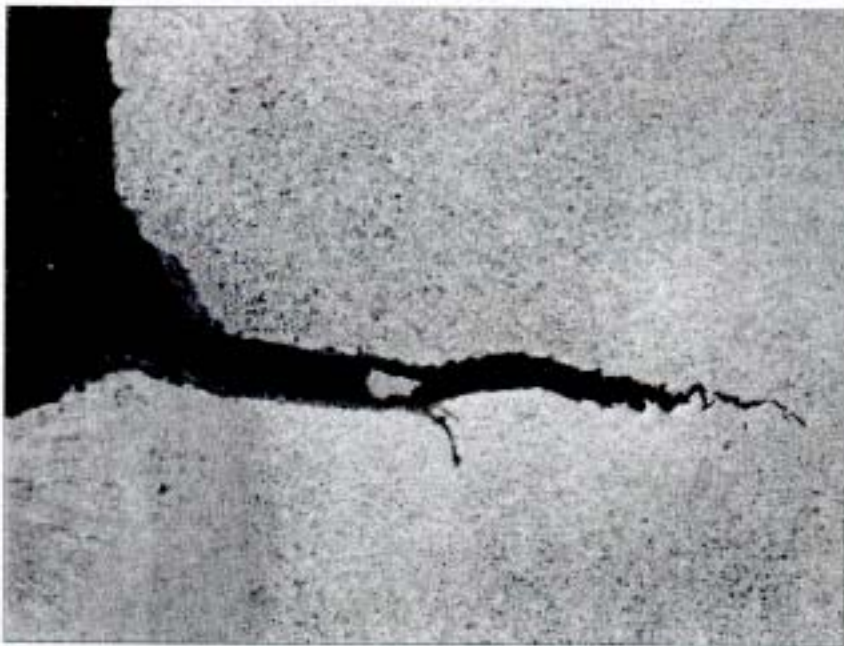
Scale coated fatigue crack with overload tear extension
